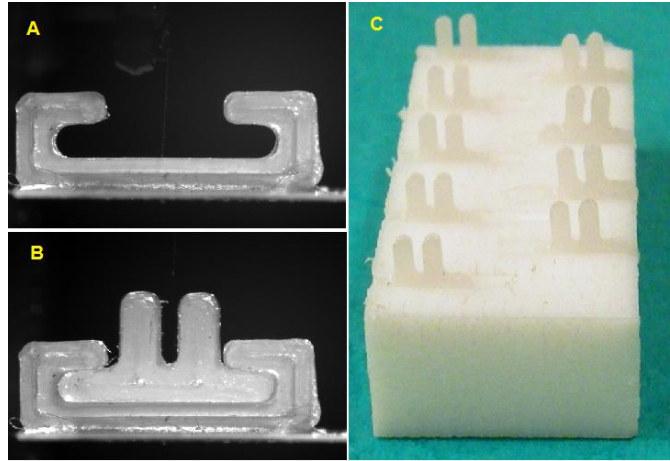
A) Connecting element; B) Bond holder placed inside the Connecting element; C) Stack of Bond holders. [40]
